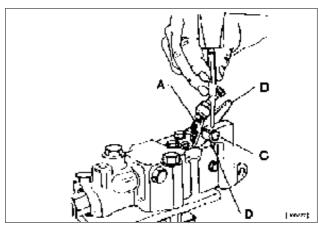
Removing the distributor ratchet return spring. A Spring
